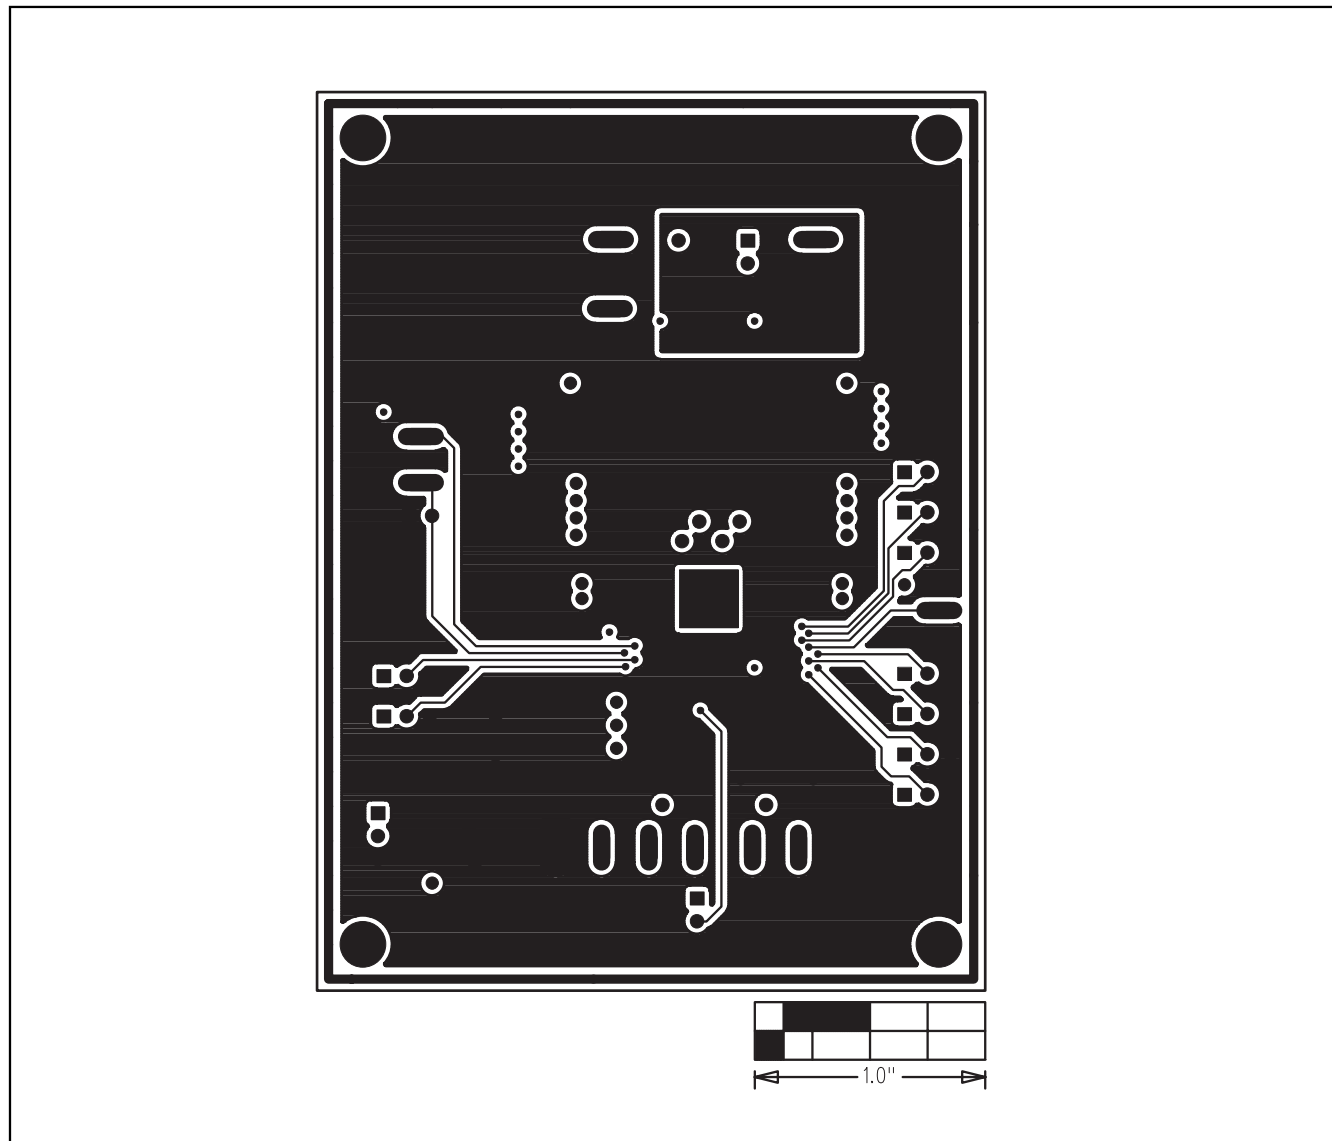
MAX9708 EV Kit PCB Layout—GND Layer 2
